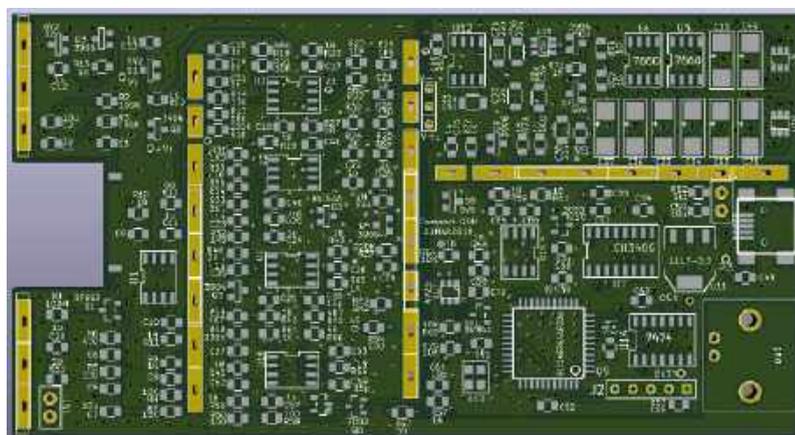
First prototype PCB with Gamma detector, pre-amplifier, shaping amplifier and MCA on a single PCB. The ground strip with slots between sections are for providing extra shielding using copper foils.
